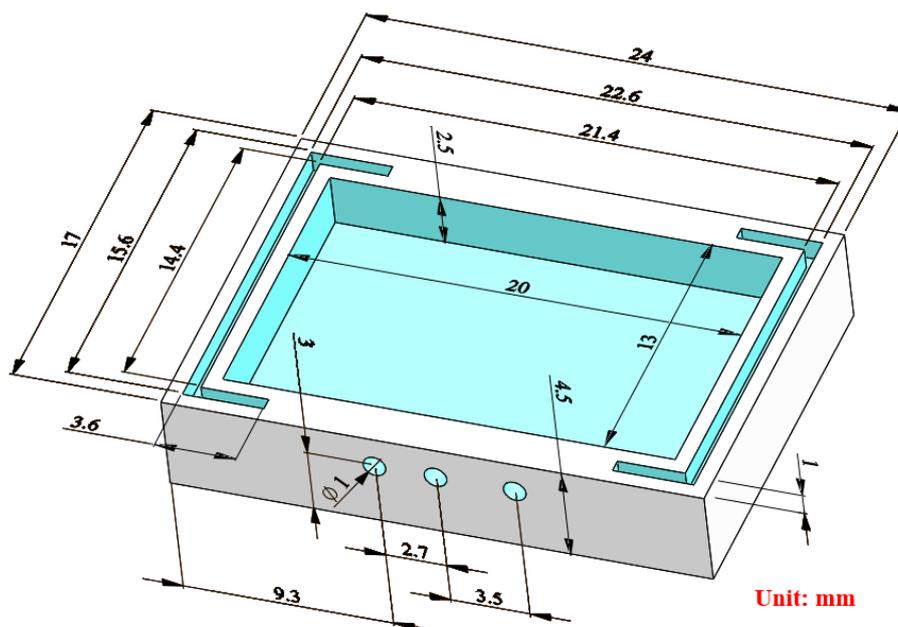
Schematic drawing to show detailed dimensions of the polycarbonate mold.
